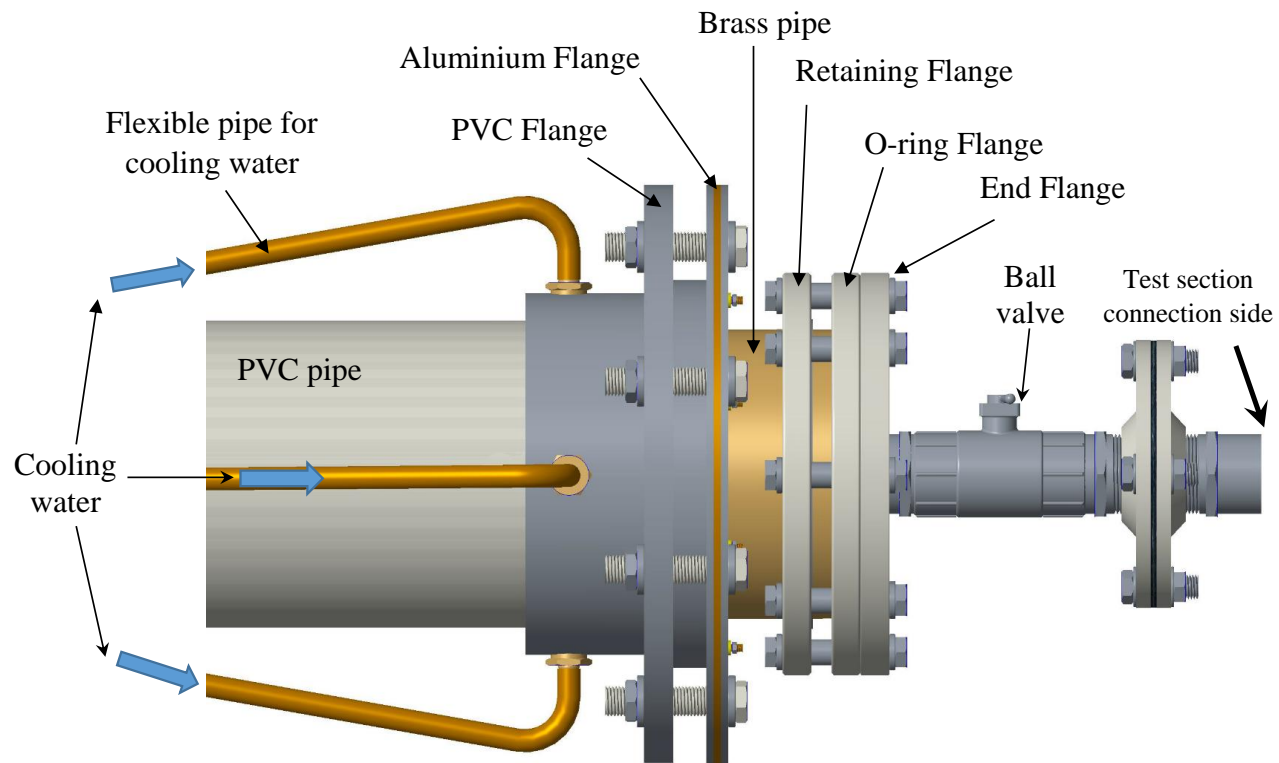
Details of the flange combination connection to hold and seal the PVC and brass pipes on the test section connection side.
